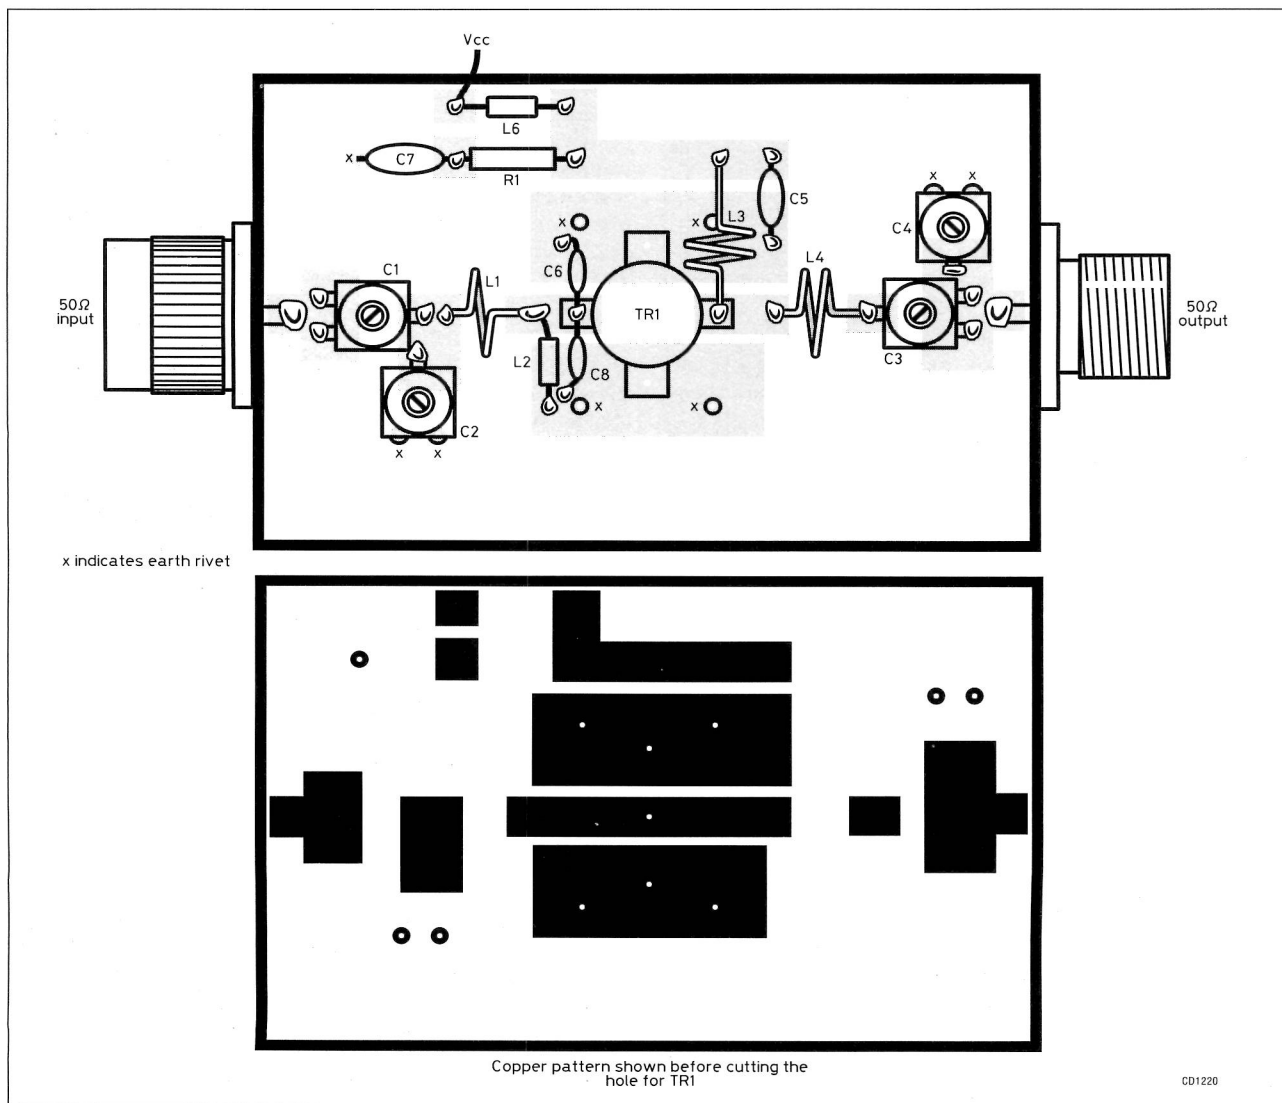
(b). Component layout and component side copper (reverse side is continuous copper)
